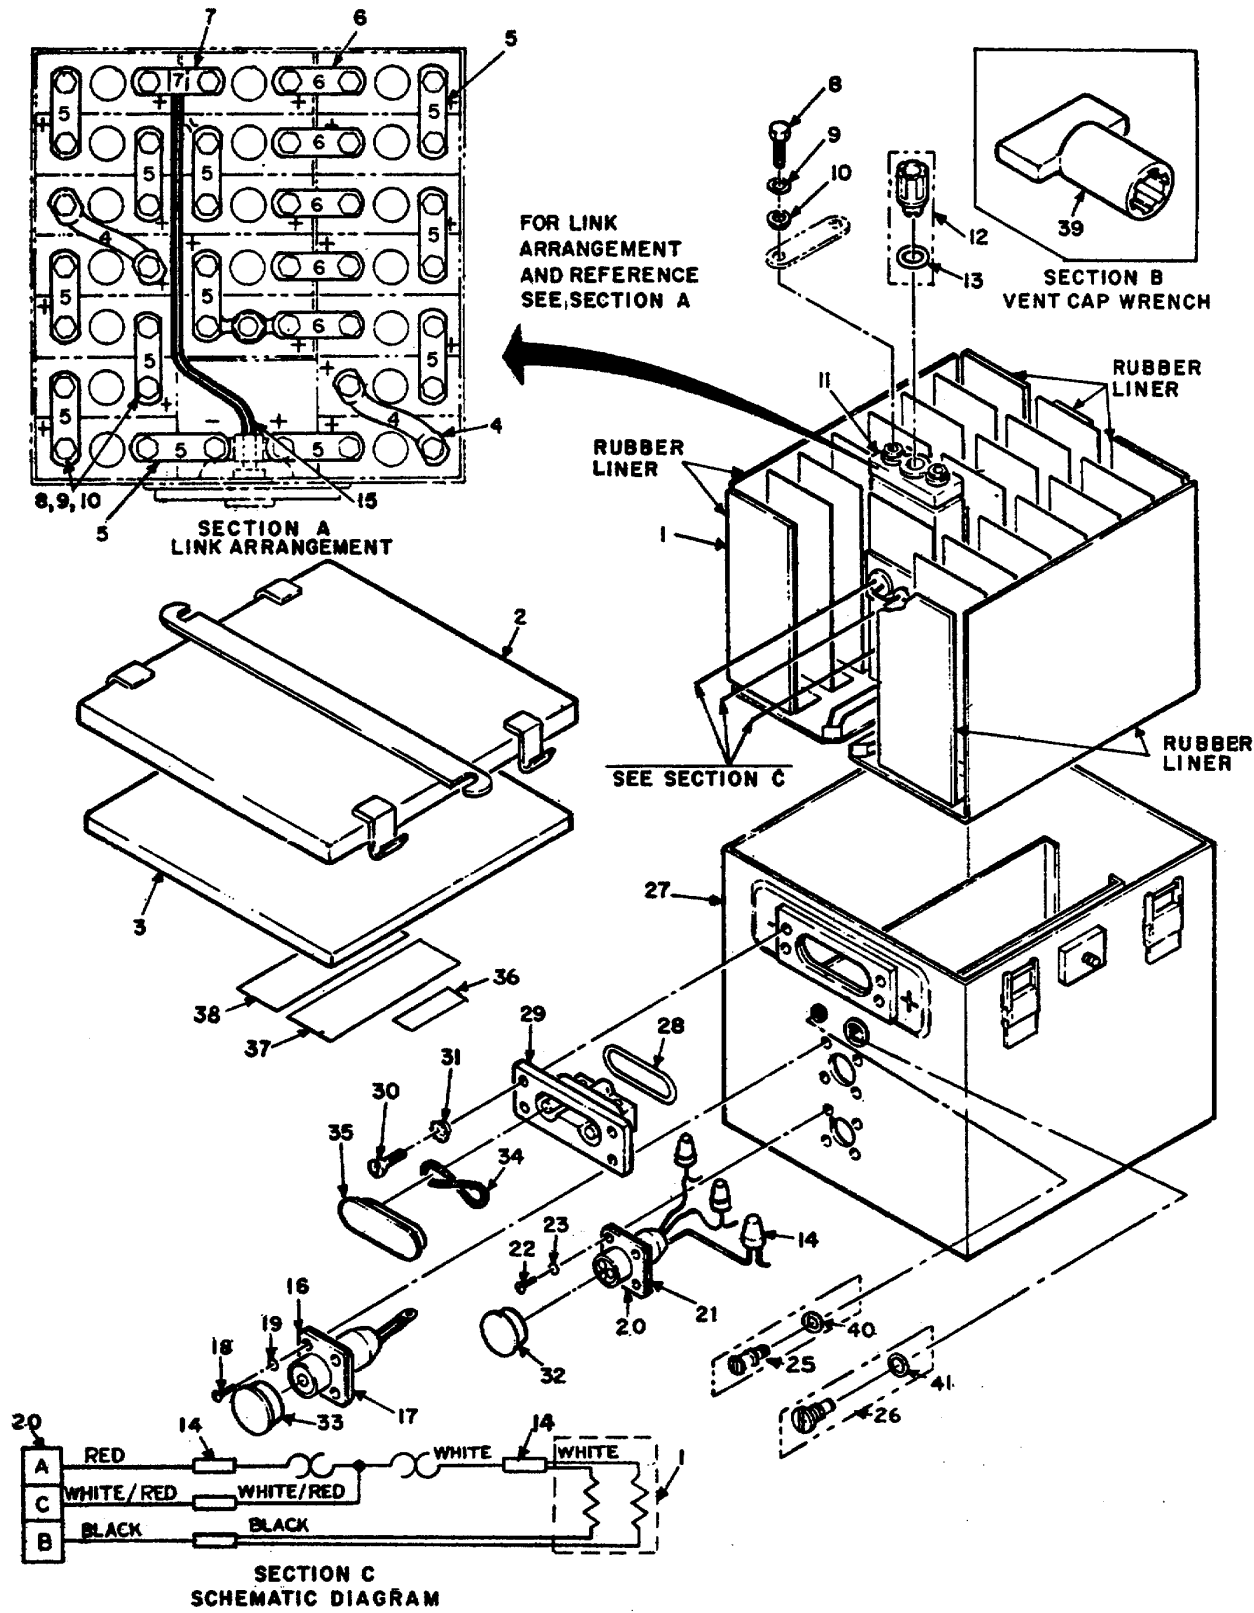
Battery, Storage BB-693a/u (Manufactured by General Electric), Parts Location.
